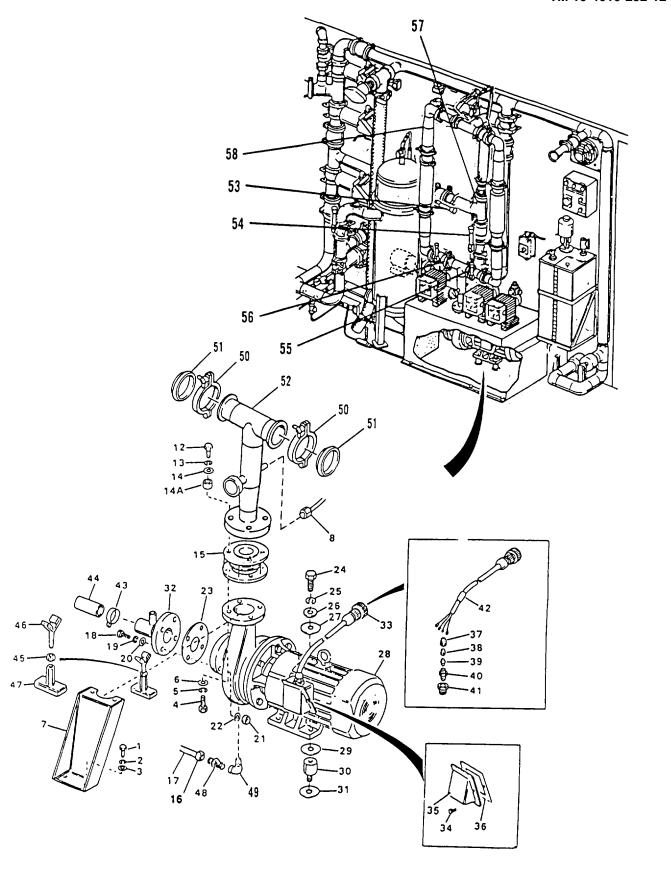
Booster Pump Motor Assembly (Sheet 1 of 2) (MODEL ROWPU-1 ONLY)
